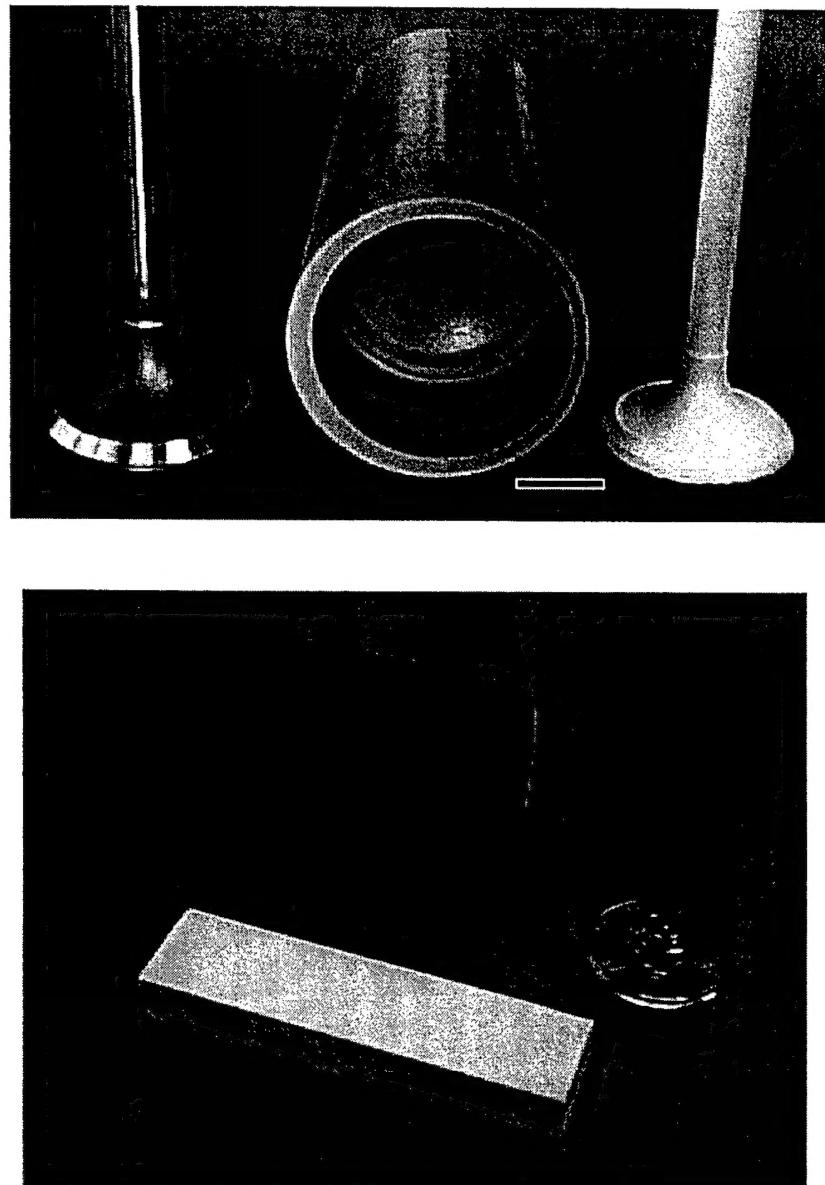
Examples of isopressed components from AKP-50 alumina. (a) Metal engine valve (left), silicone rubber mold cast from the metal part (center), and sintered alumina valve (right). (b) Green, dried bar formed in the pictured silicone mold; this is typical of the components used for mechanical characterization.
